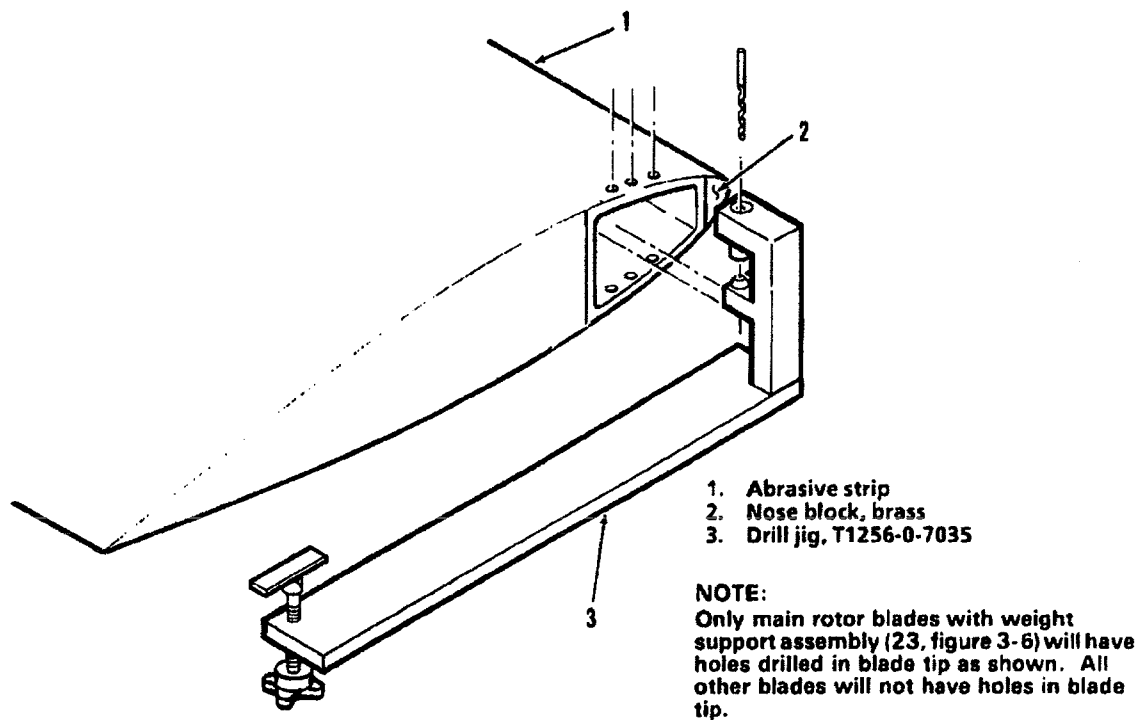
Abrasive Strip Inspection and Drill Jig Installation
